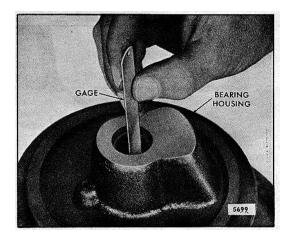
Checking Turbine Seal Ring Gap in Bearing Housing
